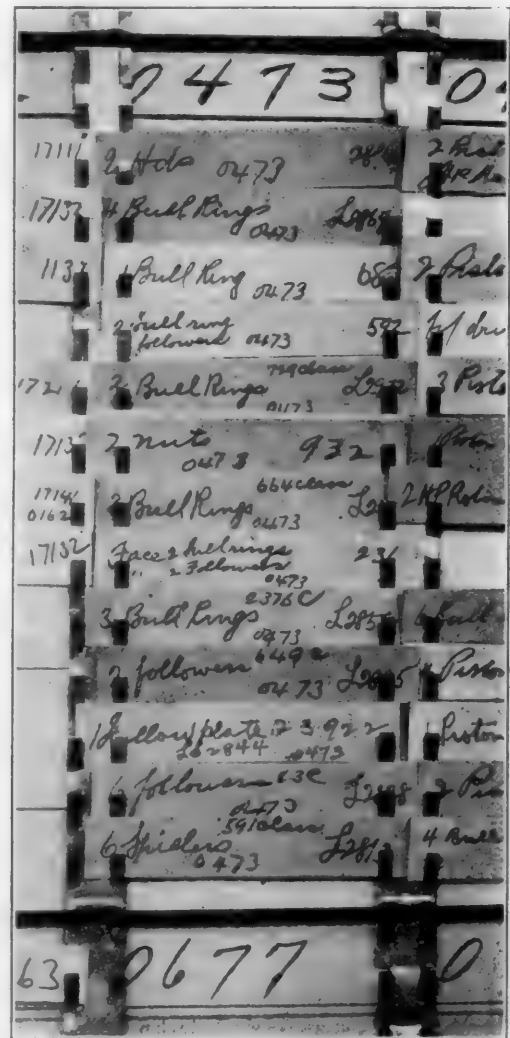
DETAIL OF DISPATCHING BOARD.
